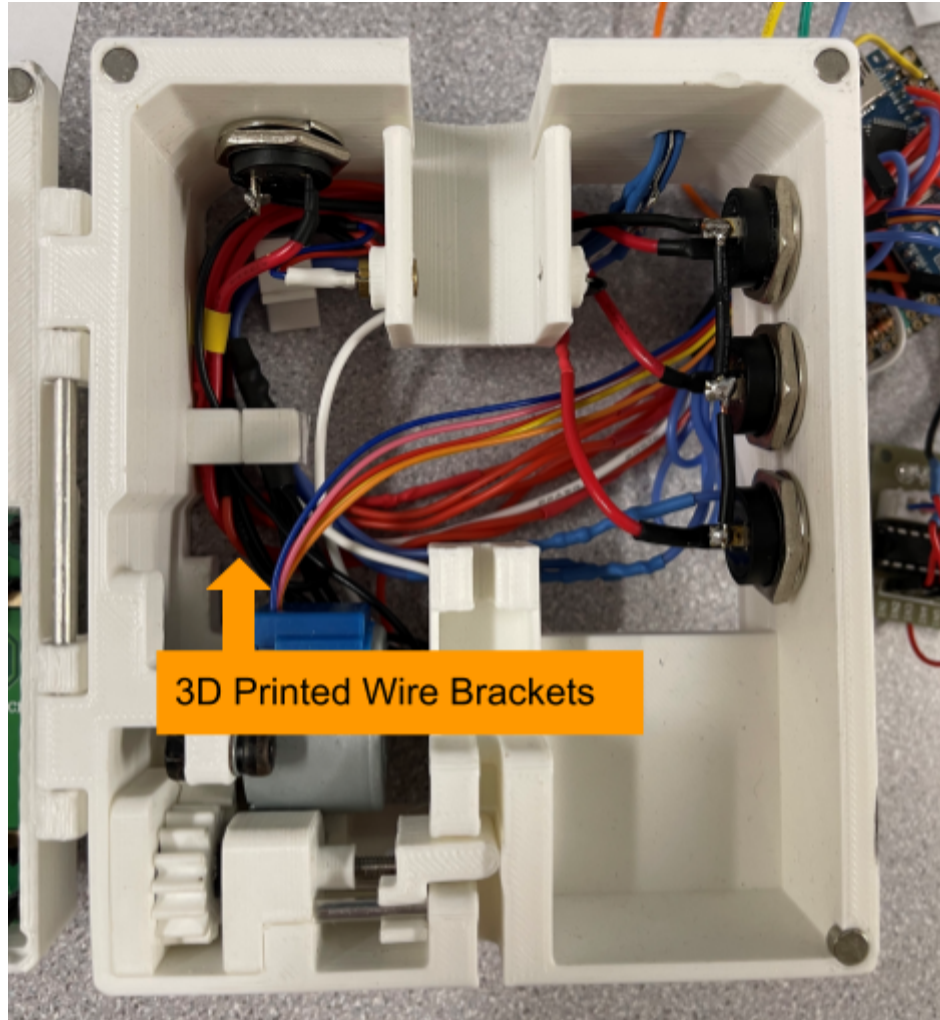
Front view of a manufactured prototype consisting 3D printed brackets for wires to organize
